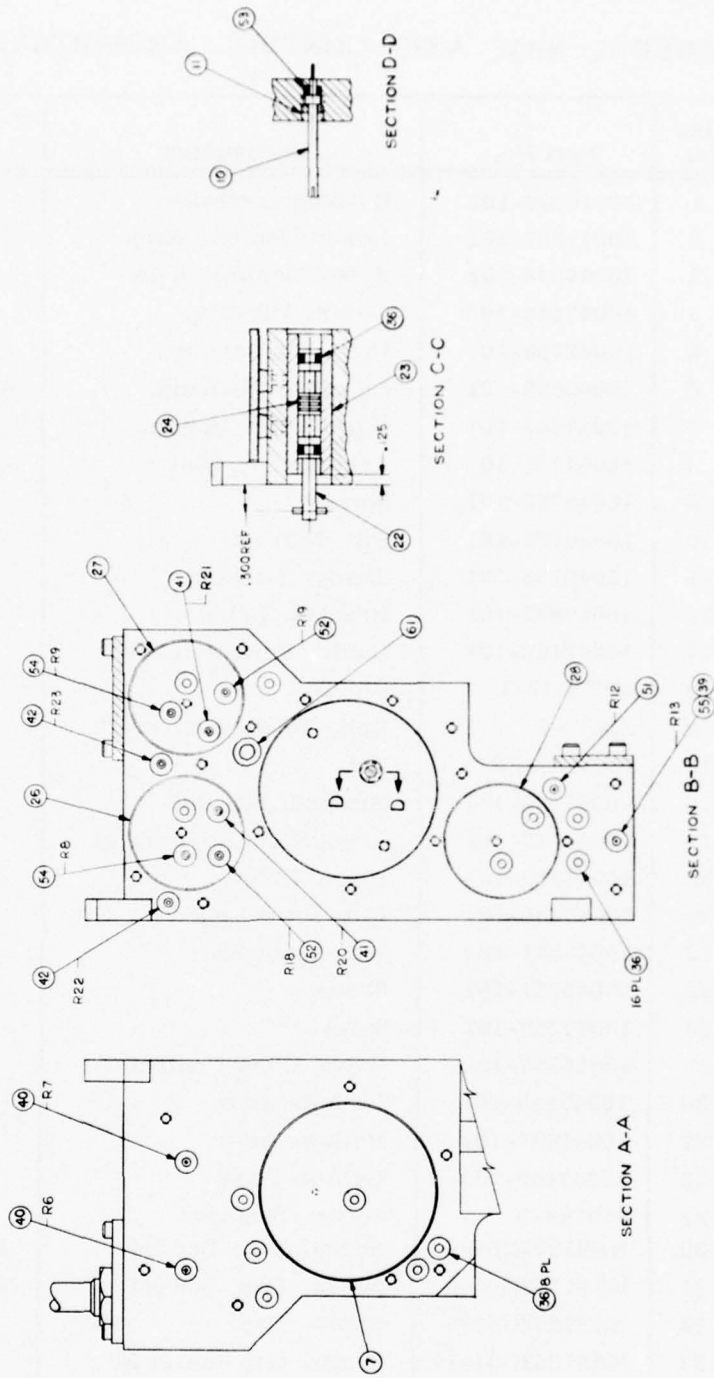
YG1143 Yaw Axis Controller Assembly Drawing (Concluded).
